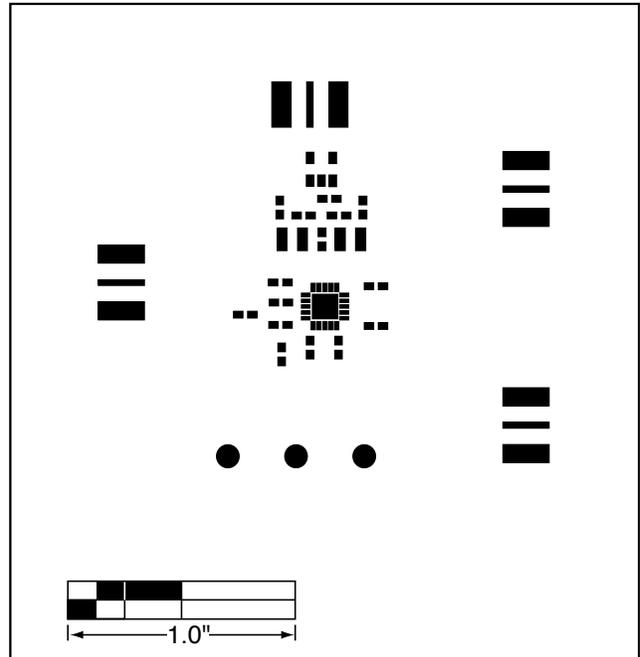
MAX9982 EV Kit PC Board Layout—Top Soldermask
